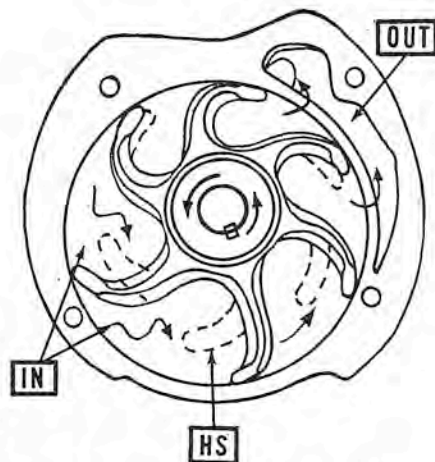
Schematic view of the rubber impeller type water pump used on all models. Impeller mounts on lower unit drive shaft and rotates in offset pump housing. At slow speeds impeller blades follow the outline of housing. Water is drawn into pump (IN) as area between blades increases, and is forced into power head (OUT) as area narrows. At high speeds, blades remain curved as shown by broken lines (HS) and pump operates by centrifugal action.
